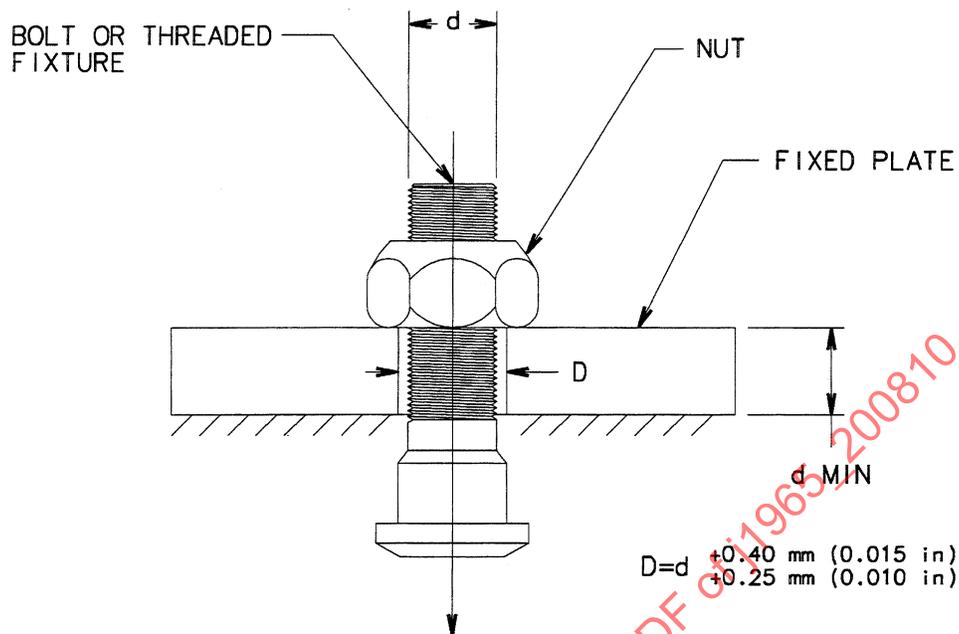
OUTER BALL SEAT NUT PROOF LOAD TEST ARRANGEMENT
